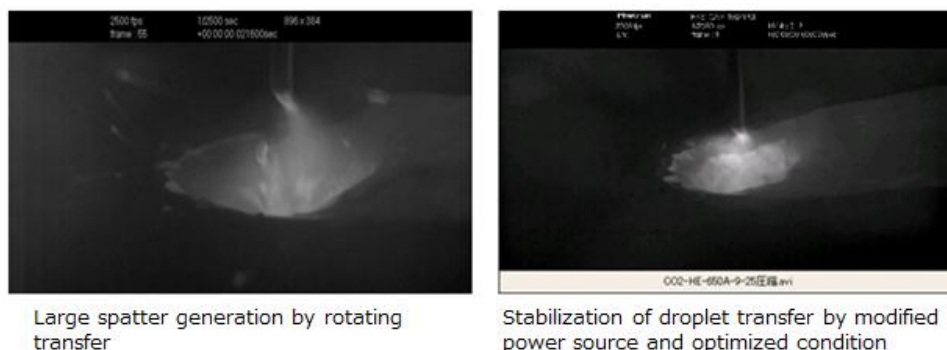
Visualization of droplet transfer phenomenon in large-current welding through high-speed camera technique.
